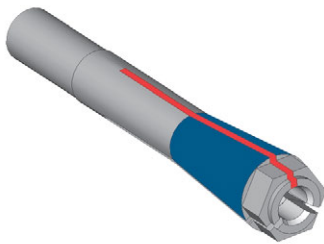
GREASING THE COLLET CHUCK; SURFACE IN WHICH GREASE IS TO BE APPLIED IS MARKED IN BLUE; SLOT THAT MAY NOT BE GREASED IS MARKED IN RED
